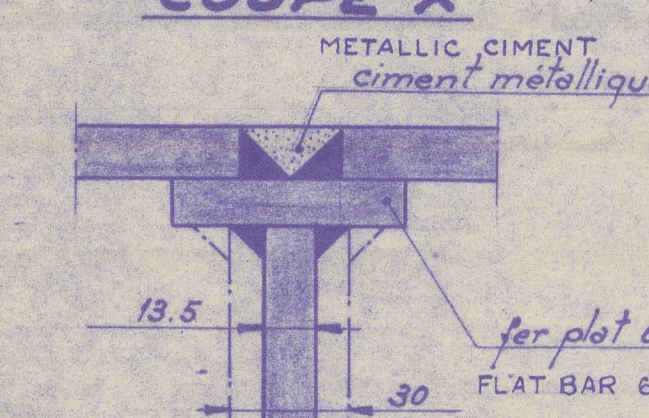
DETAIL OF WELDING AT PORT SIDE FOR PLATING CONNECTION WITH WEBS
